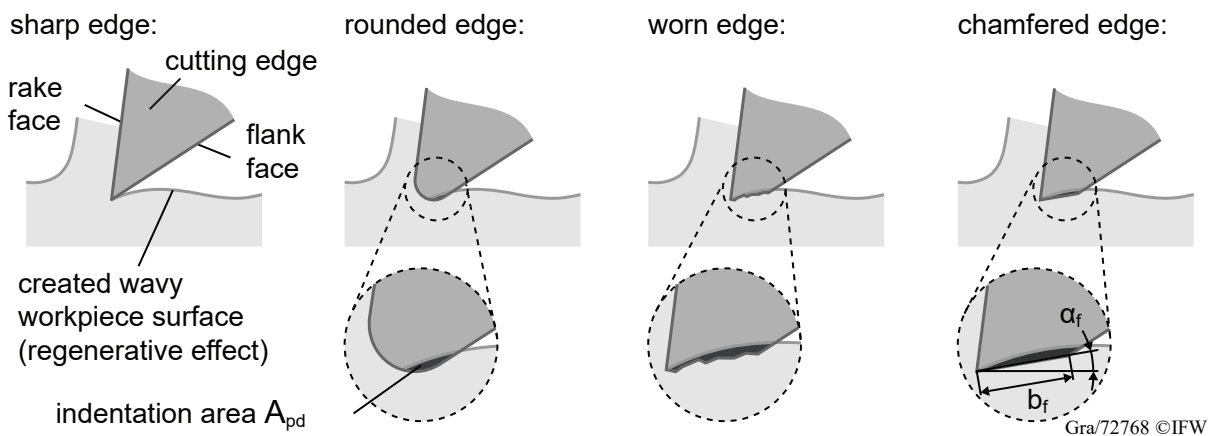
Influence of the cutting edge shape on its contact with the just cut workpiece surface.
